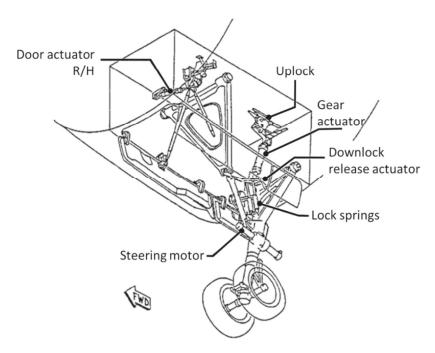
A typical Nose Landing Gear with rack and pinion type steering motor (source Airbus)
